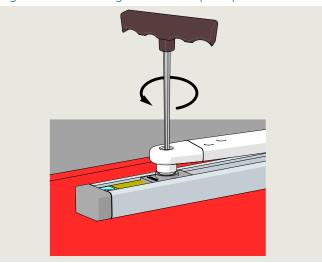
Fastening drive arm with CPD to pivot pin
